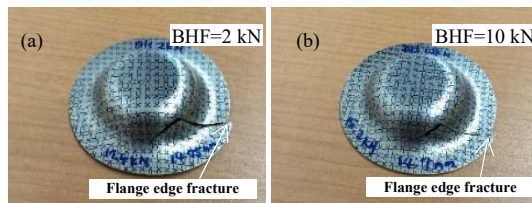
Exterior views of fracture location after the deep drawing test
